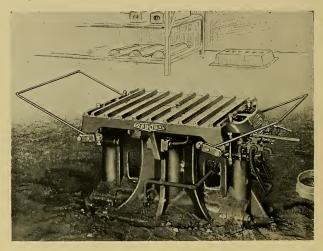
Foundry Floor View of Jolt-Ramming Power-Stripping Moulding Machine with Working Parts Protected.
